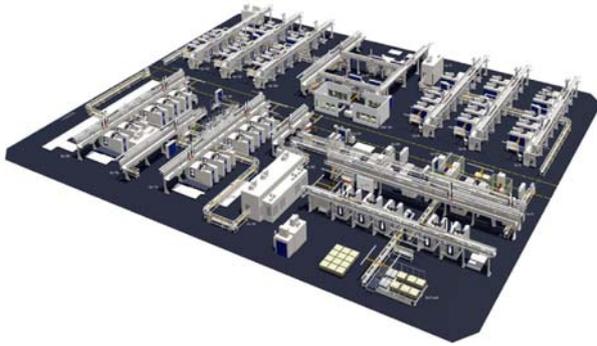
Ford Winsor Engine Plant with CNC machines [26]
